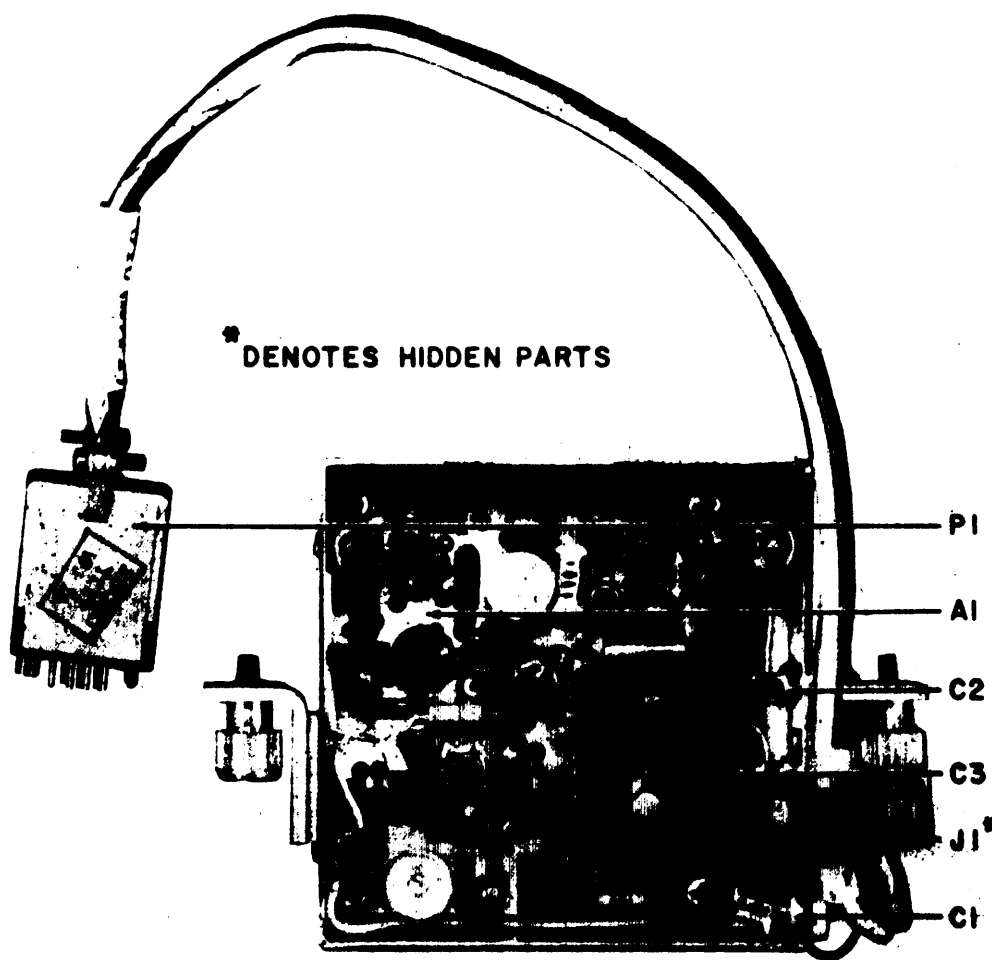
Type 791784 FM Discriminator Assembly (A7), Location of Components
